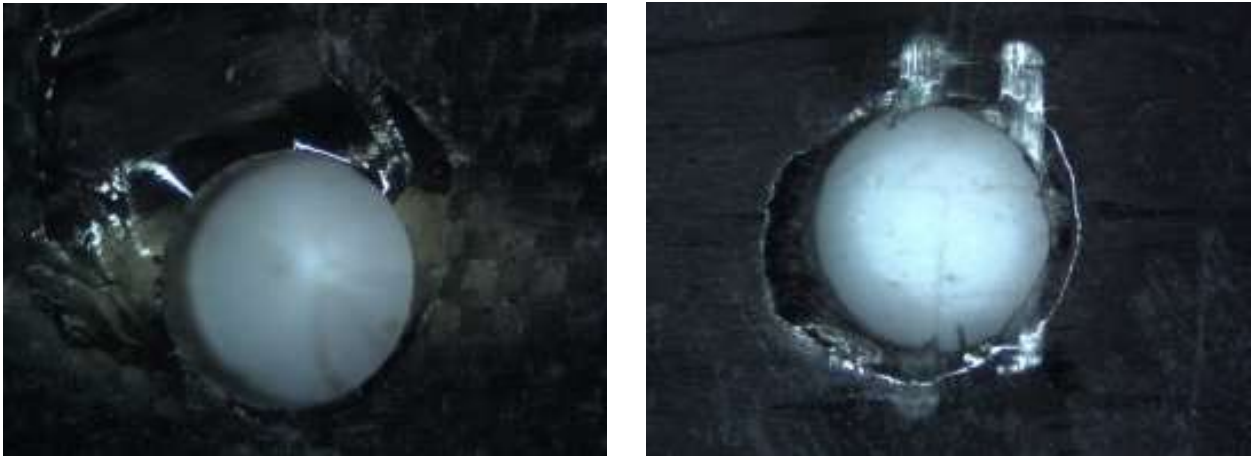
Detail of fractured resin around holes, left moulded hole and right drilled hole.
